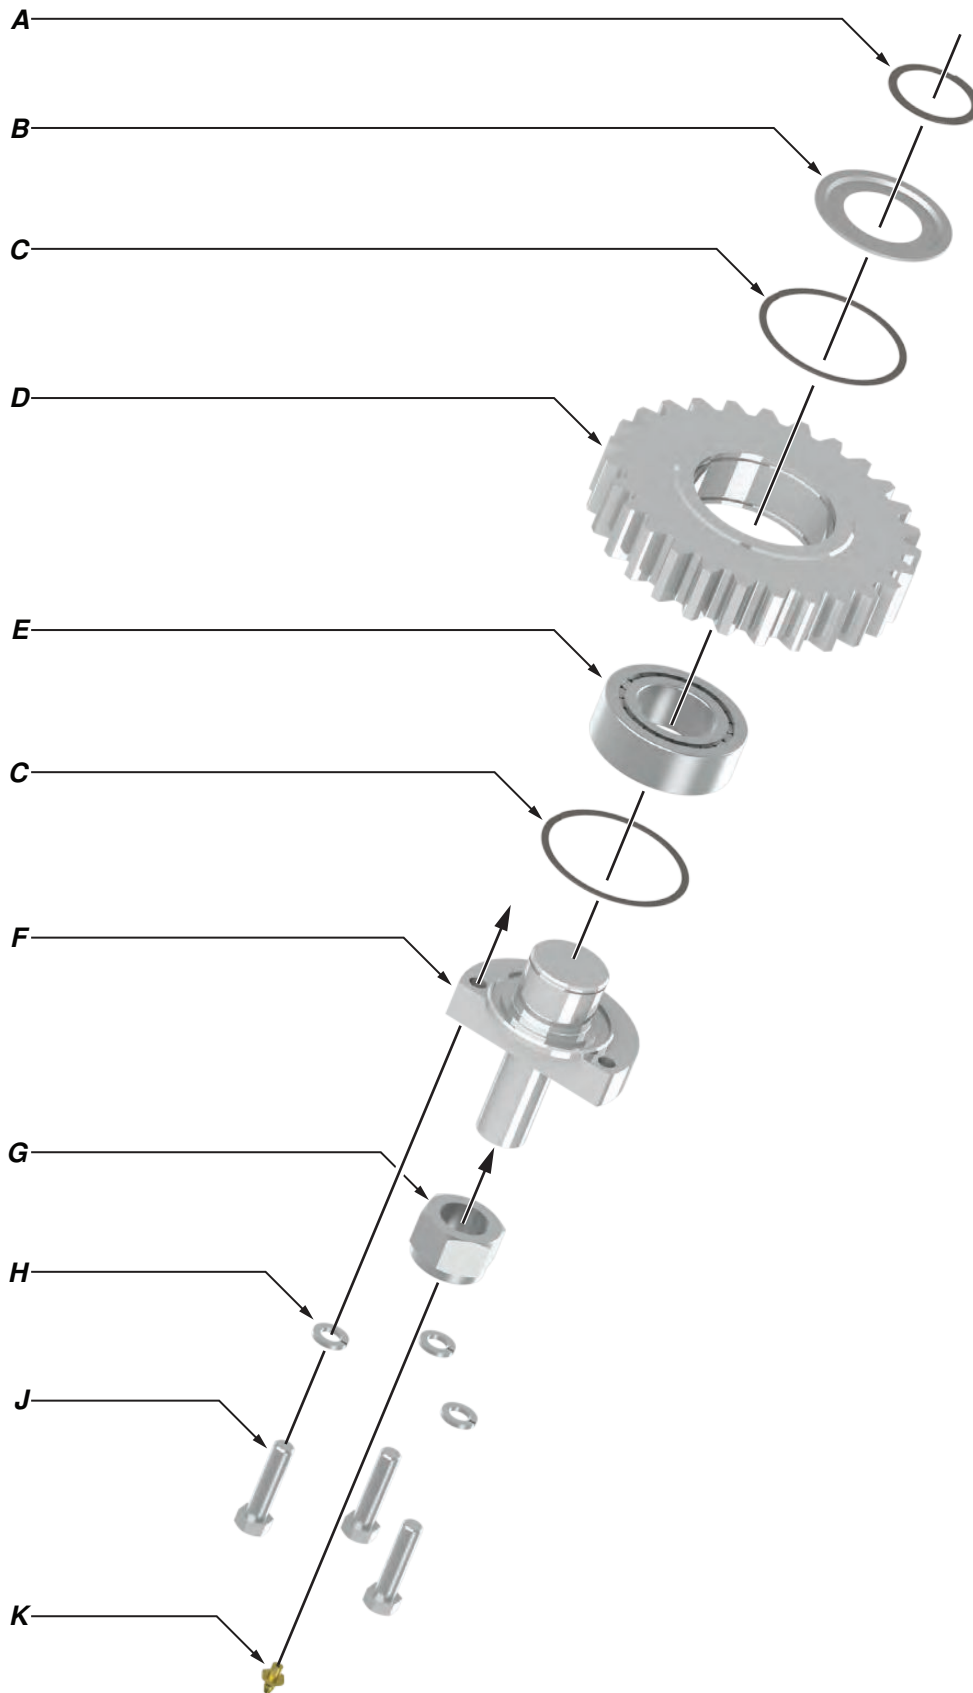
HD9625 Rotary Idler Exploded
